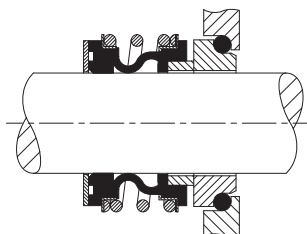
Design of mechanical seal with elastomer bellows and O-ring
